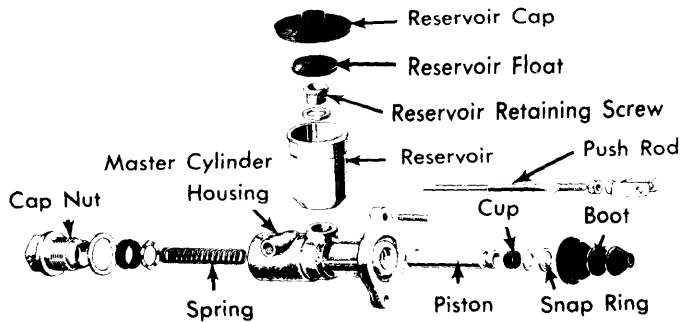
Exploded View of Corona Mk II Clutch Master Cylinder
